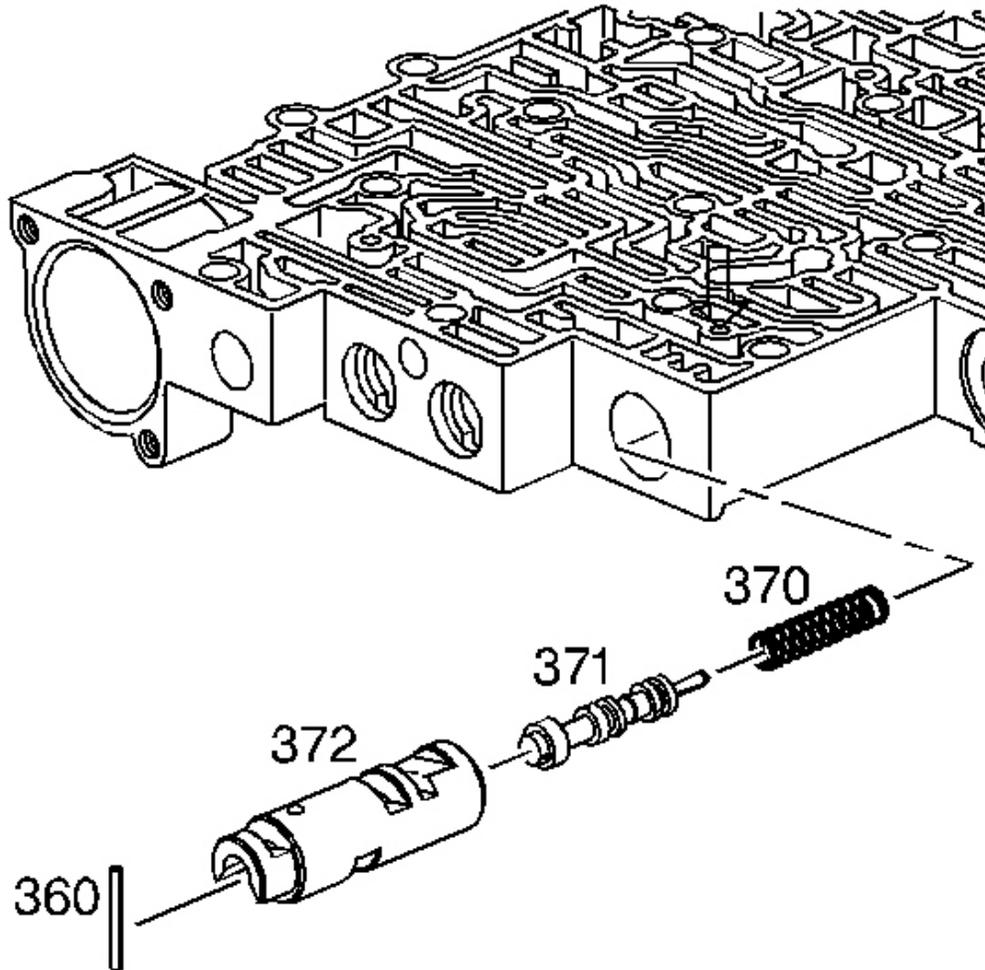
Coiled Spring Pin, 1-2 Accumulator Valve Sleeve, 1-2 Accumulator Valve & 1-2 Accumulator Valve Spring
